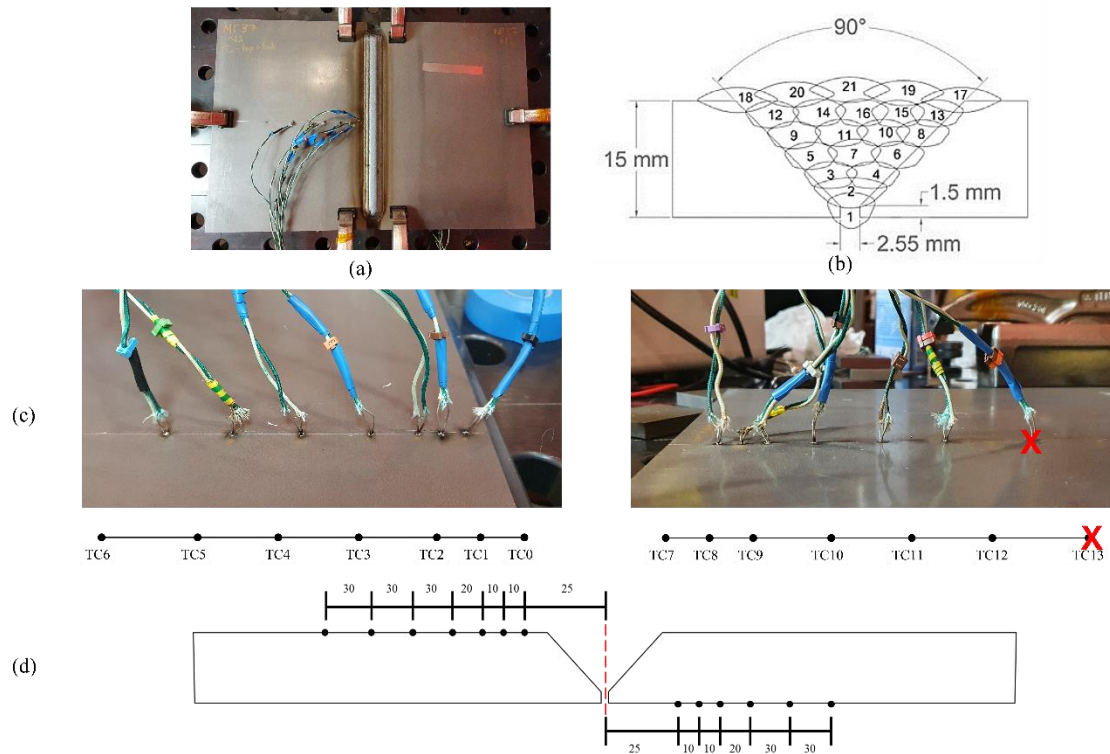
Schematics describing the experimental setup. (a) A photograph showing the completed welded assembly of two 300.00x16.00x400.00 mm S275 carbon steel plates, (b) A cross-sectional schematic of the welded fabrication documenting the weld procedure specification where the numbers refer to the sequential order of each weld pass, (c) Photographs showing the experimental thermocouple placement along with their respective label where faulty thermocouples are denoted with a X (in red), (d) A schematic denoting the thermocouple placement with respect to the centre of the weld. Note: The distances shown are not to scale but occur in the same order as documented in Figure 3(c). TC = Thermocouple.
